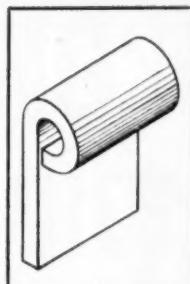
This roll is 270 degrees with the edge nearly touching the sheet perpendicularly.
